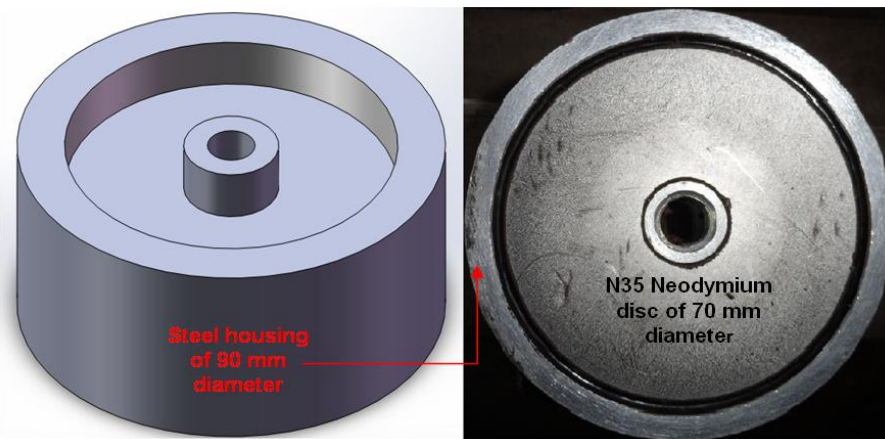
Steel housing of 90 mm diameter of magnetic pot of 70 mm diameter used for table, knee and saddle to machine column assembly
